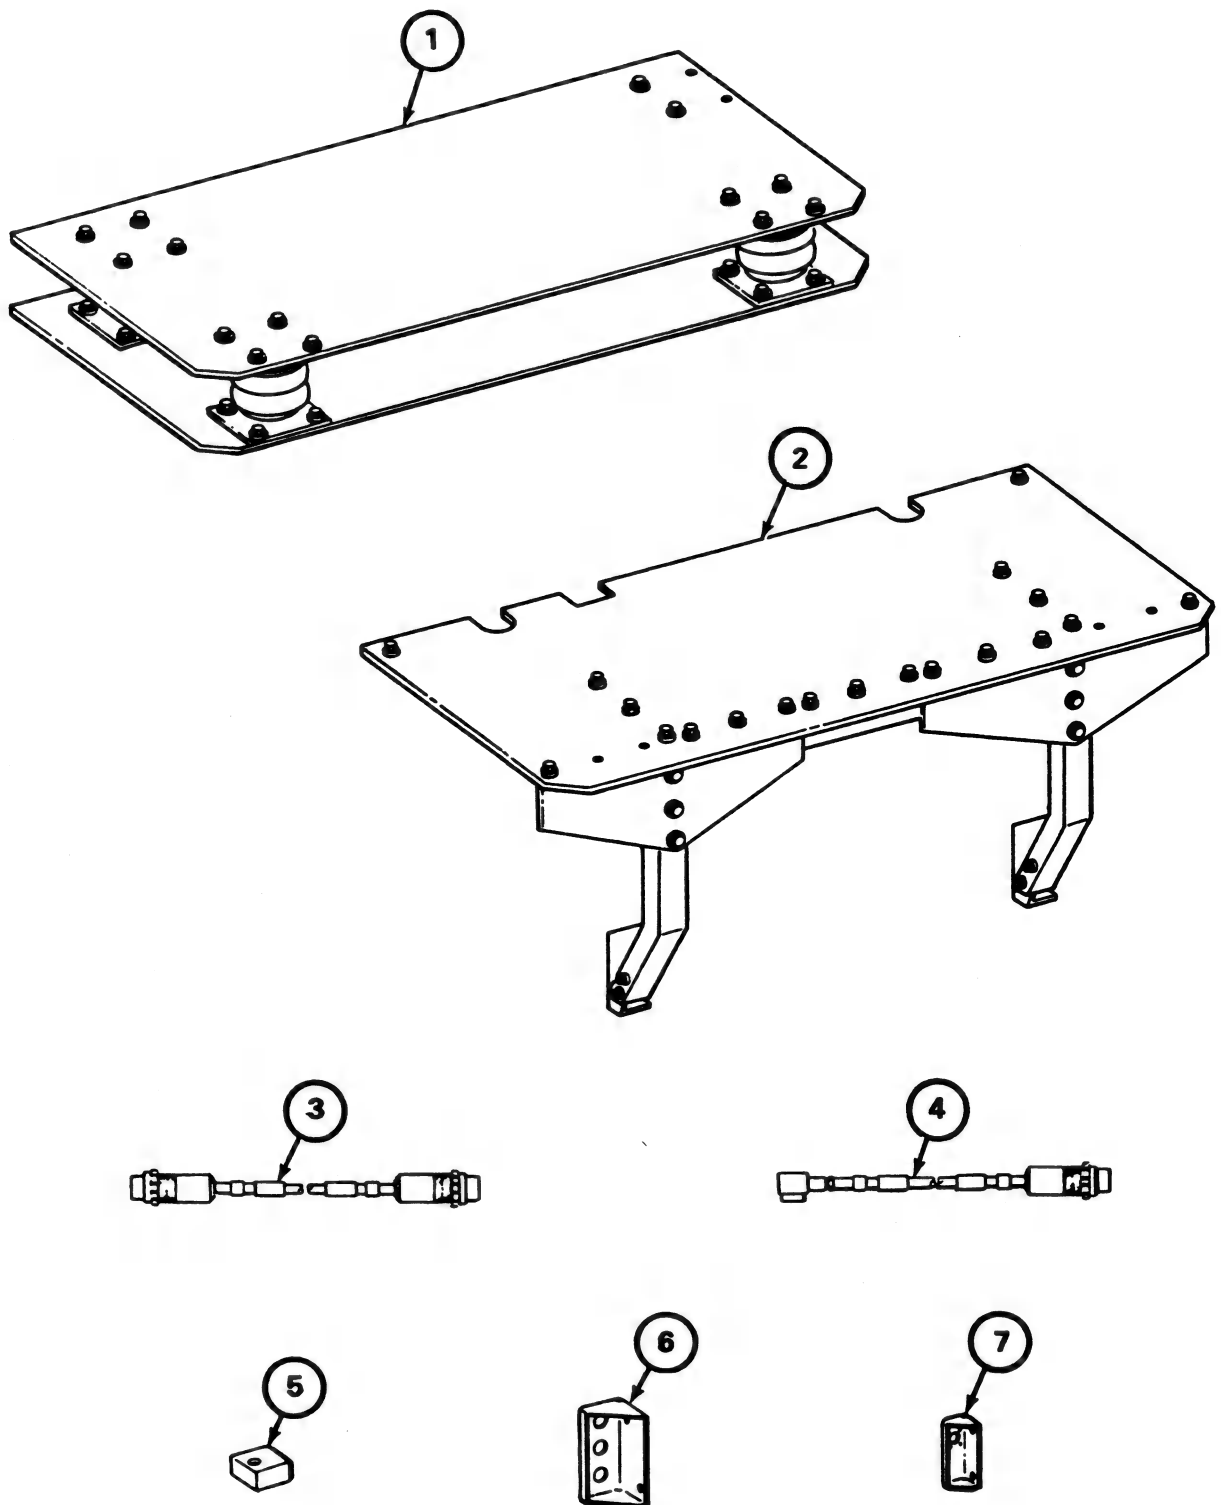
Mounting Kit Assembly M577, MK-1832/GYK-29(V).
